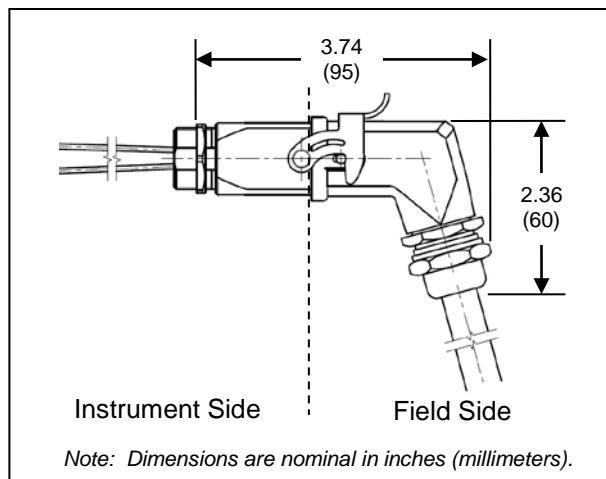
Dimensional Drawing of Coupled Connector – Top Entry Hood
